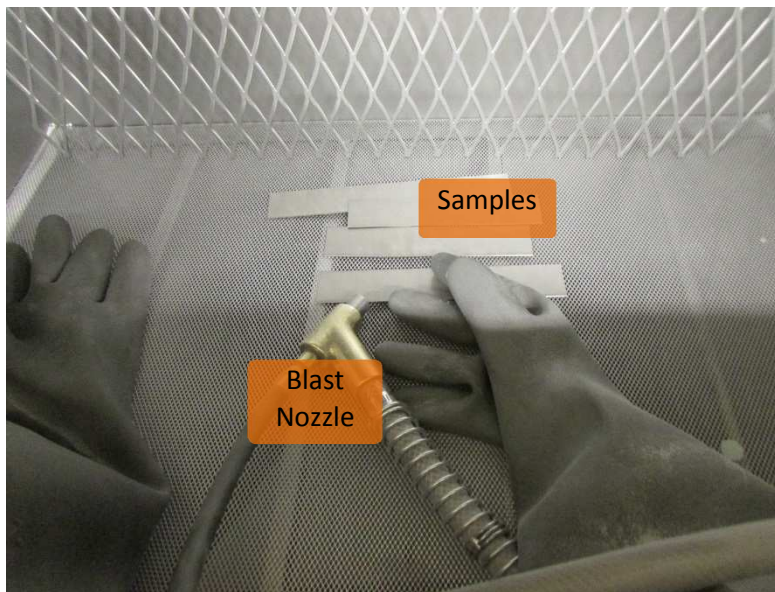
Interior of bead blast cabinet showing equipment, samples, and blast gun.
